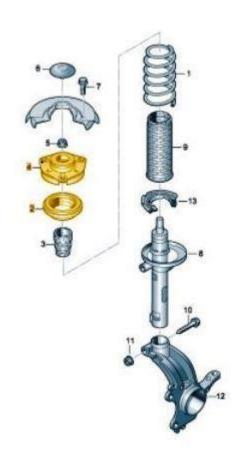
Suspension strut mounting and axial deep-groove ball bearing.
